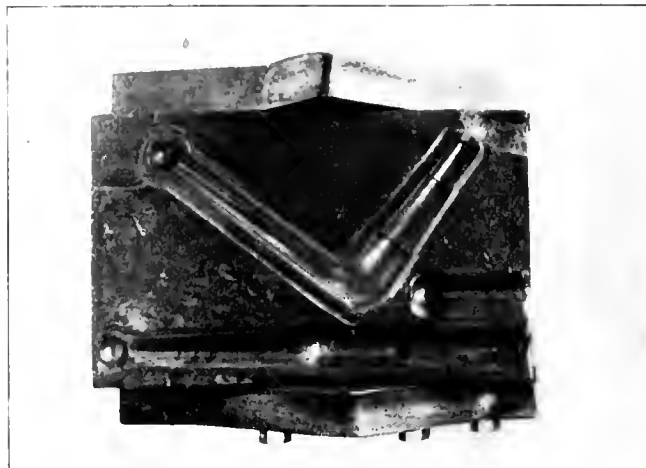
Drop Forging Die and Bending Die for Steering Gear Part.
